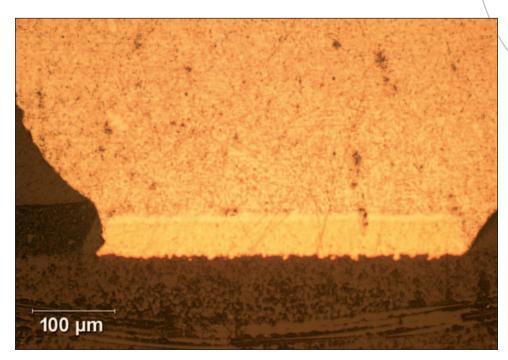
Metallographic image of a good solder joint along the board pad to solder ball interface.
